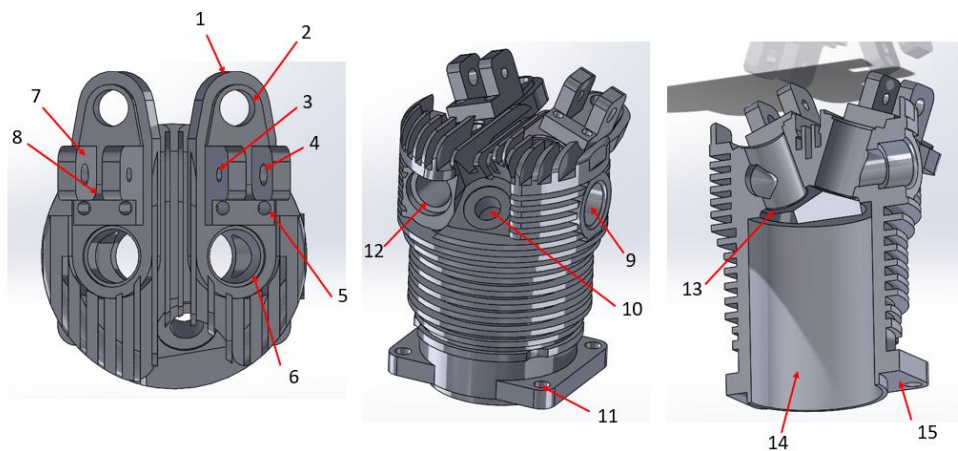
Surface and feature identification for the cylinder head: top view, bottom view, and cut section view
